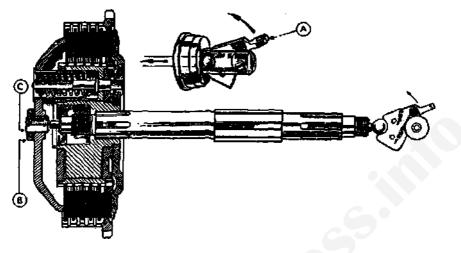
CLUTCH, GEARBOX MAINSHAFT AND CLUTCH-OPERATING MECHANISM.
